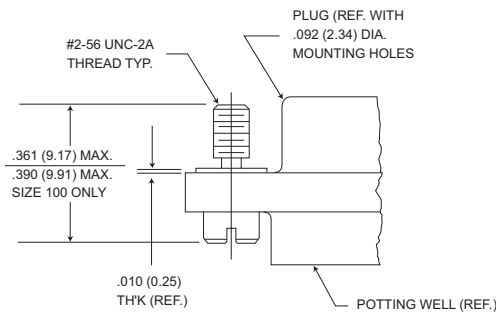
Jackscrew - Low profile Slotted Head Size 9-51 Size 100
